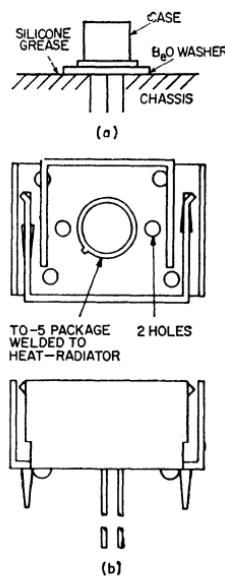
Suggested mounting arrangements for transistors having a JEDEC TO-5 package: (a) without heat sink; (b) with fin-type heat sink.
